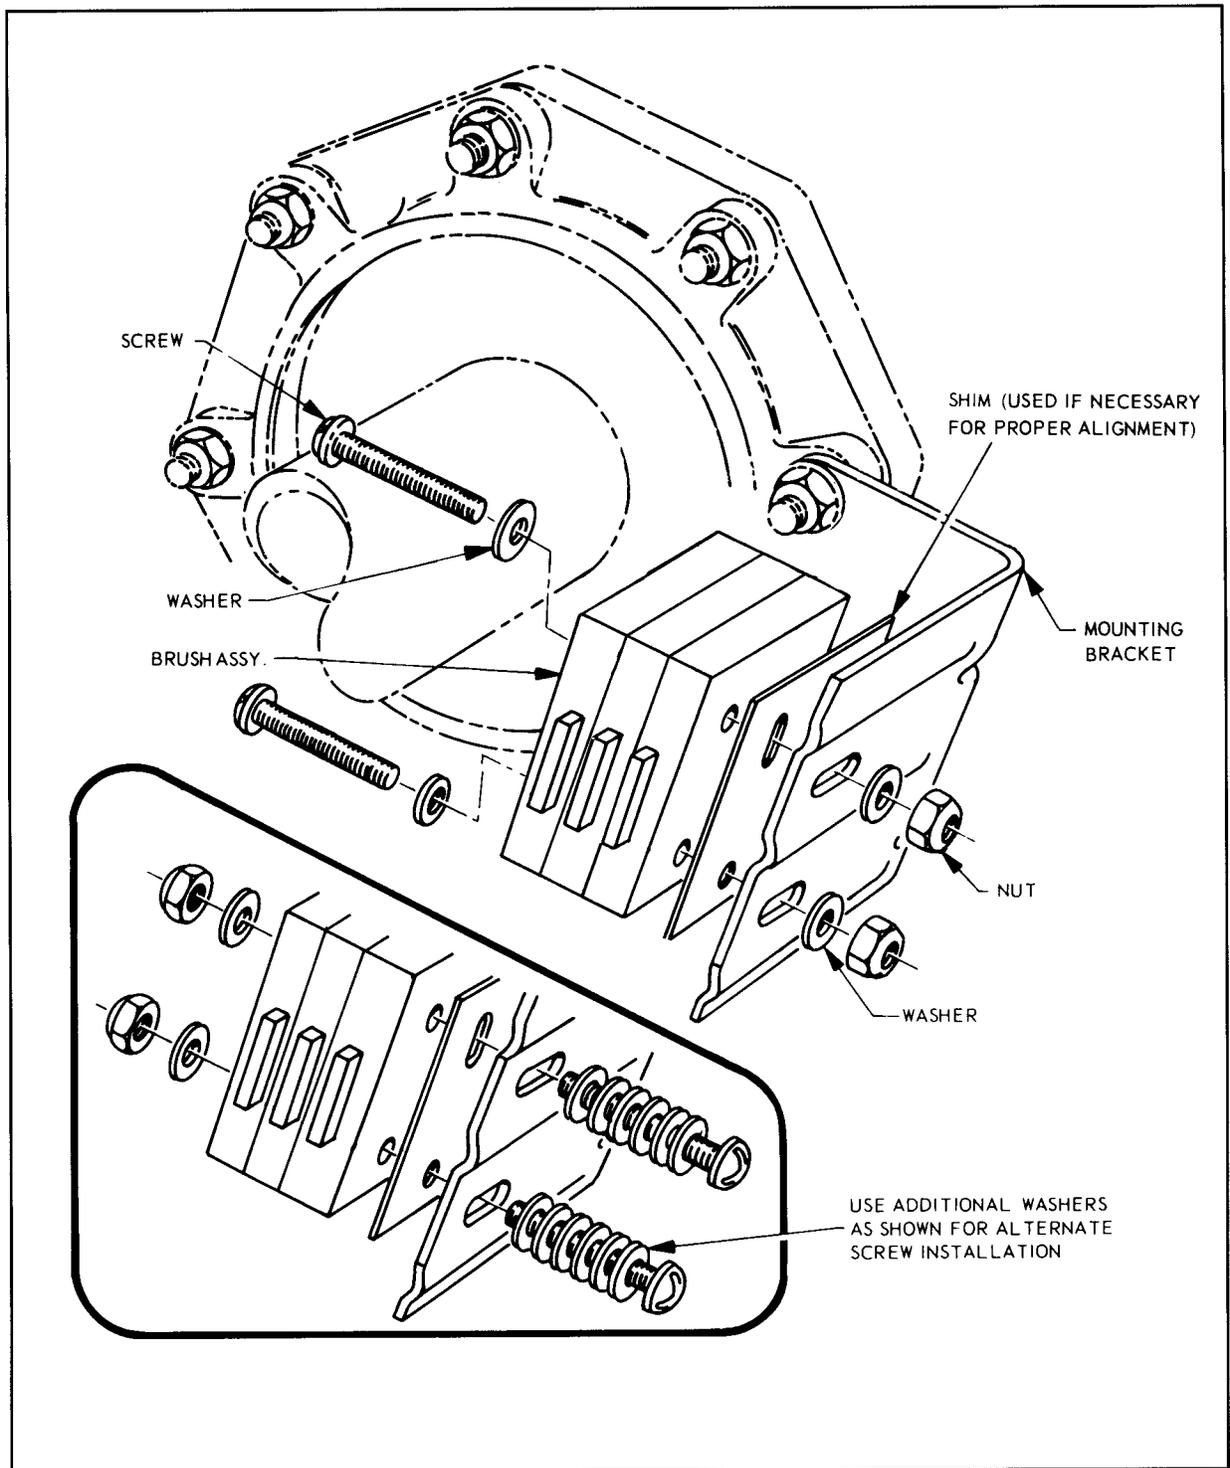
Typical Brush Assembly Mounting Bracket Installation
